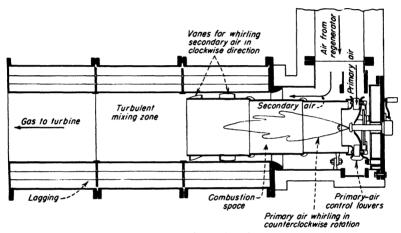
Double-shell combustion chamber of Allis-Chalmers 1500 F unit. Only combustion air enters the flame tube. The flow of excess air cools the metal sections.
